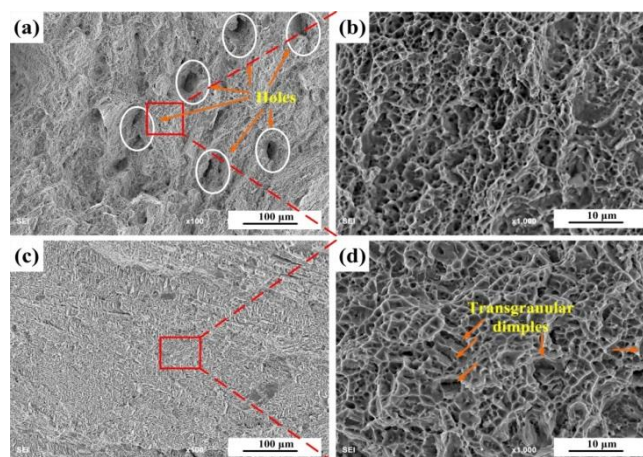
Fracture micrographs of the tensile samples of the welded joints: (a) and (b) 1670-8, (c) and (d)
